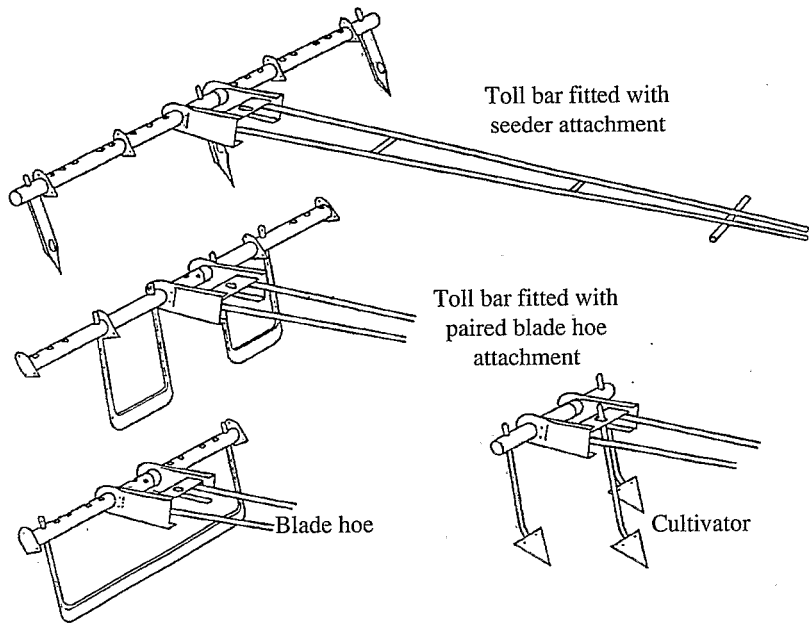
The multi-purpose tool bar developed at Gujarat Agricultural University, Junagadh Campus, shown with attachments.
